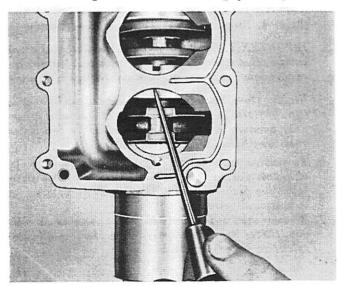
Scribing Center Main Bearing Page 12 Master Service Manual
